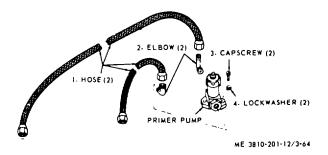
Primer pump (for engine model 687C-18-ES) removal and installation.
